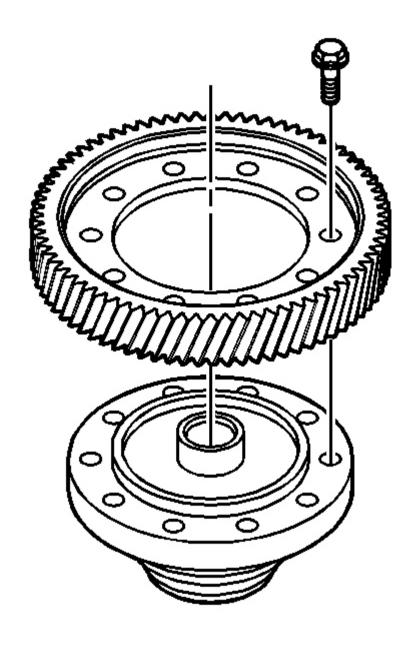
View Of Differential Gear Courtesy of GENERAL MOTORS CORP.
